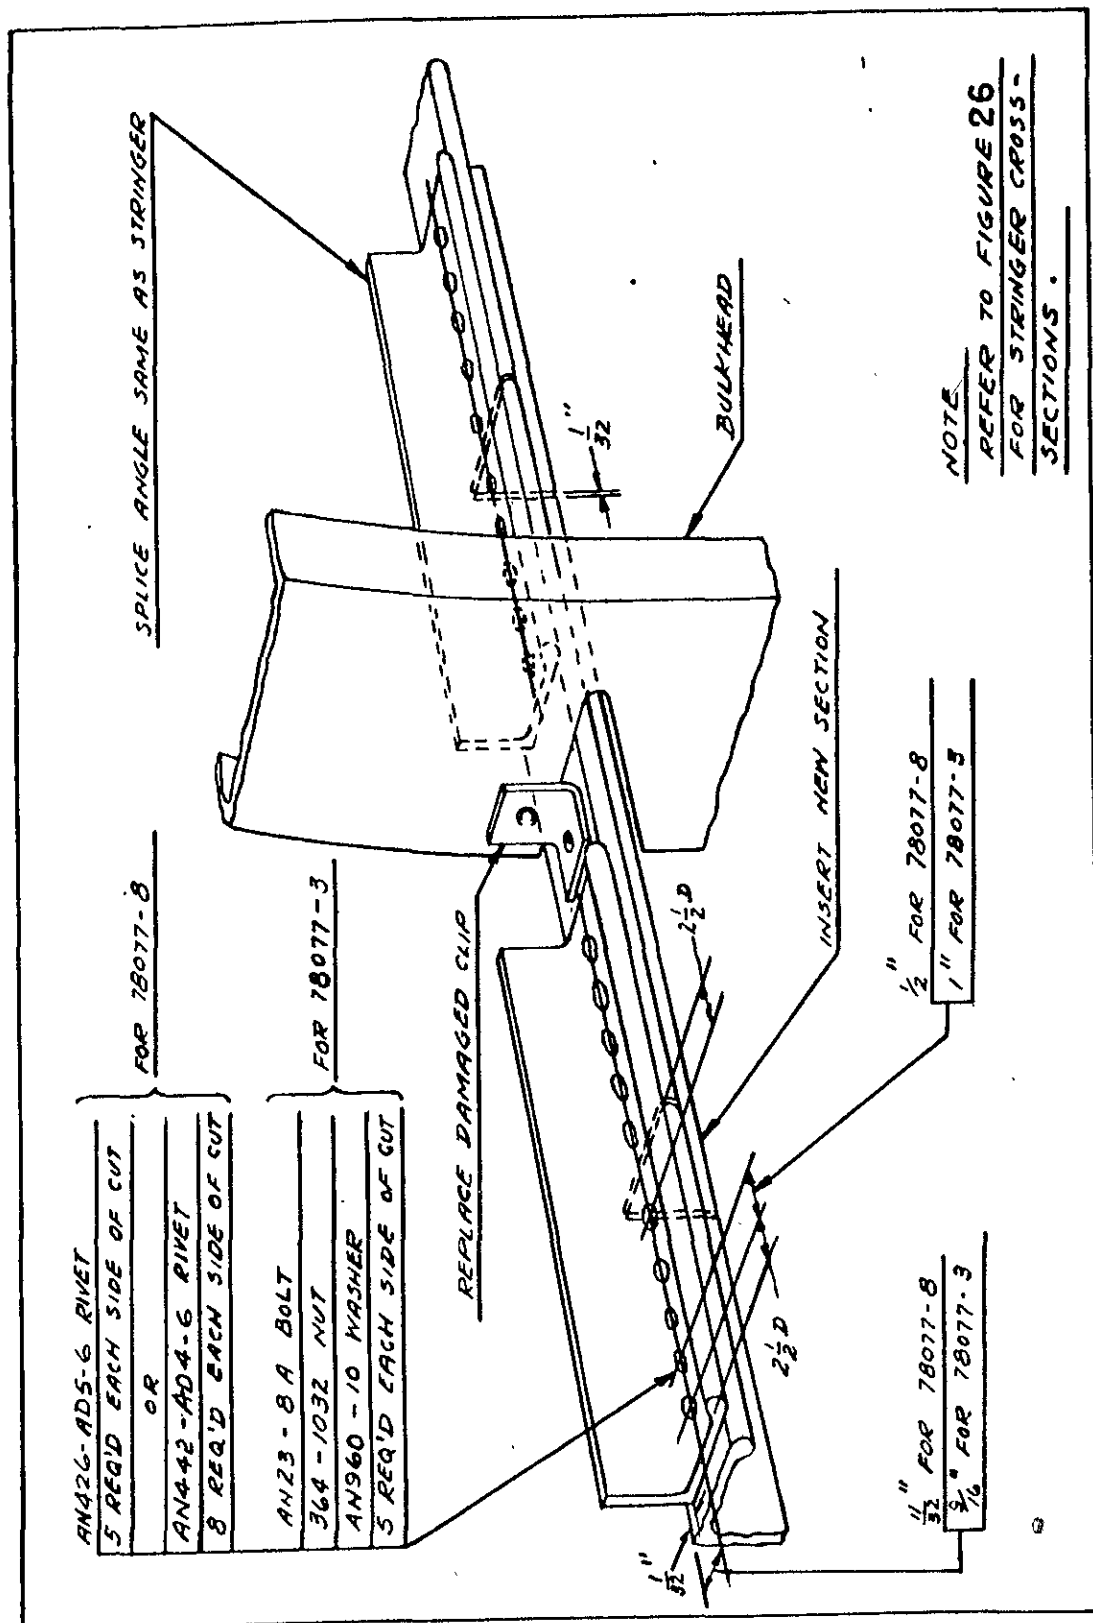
Fuselage - Stringer Insert at Bulkhead
